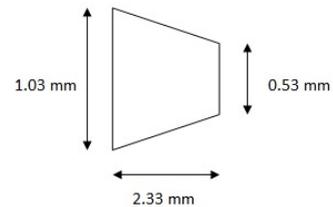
MILD STEEL KNIFE : MEASUREMENTS OF THE CUTTING EDGE
